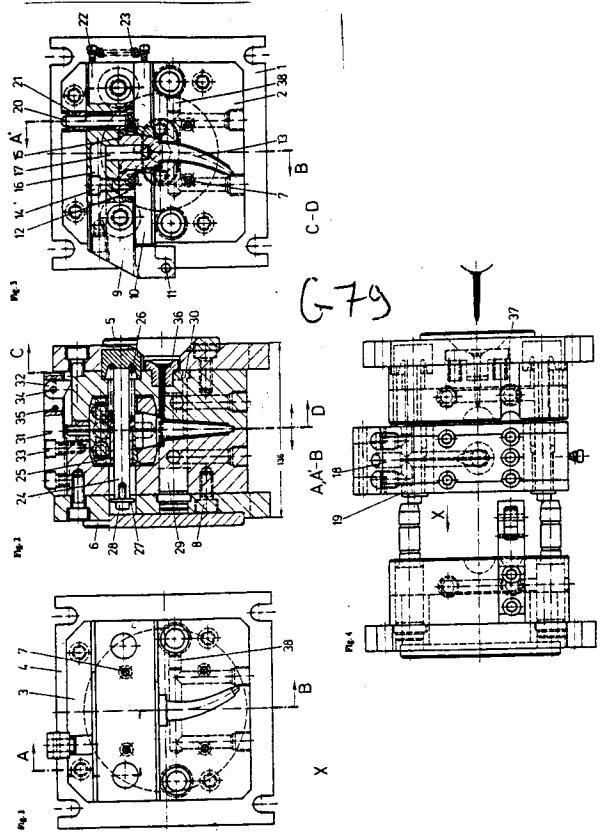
Section through the 20-cavity injection mold with hot-runner manifold and indirectly heated (thermally conductive) torpedos as well as an assembly facility for fitting the carriage-ring runners together inside the mold.
